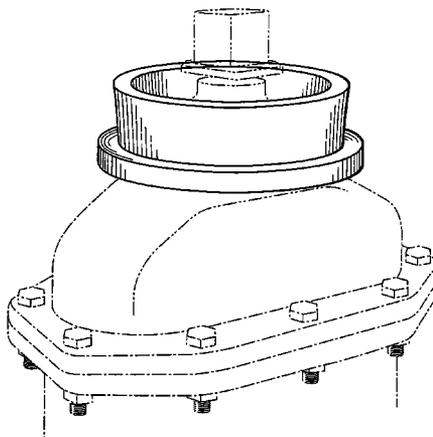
is right side elevation view of the structure of FIG. 1, the left side view, front side view, and rear view being identical thereof.
